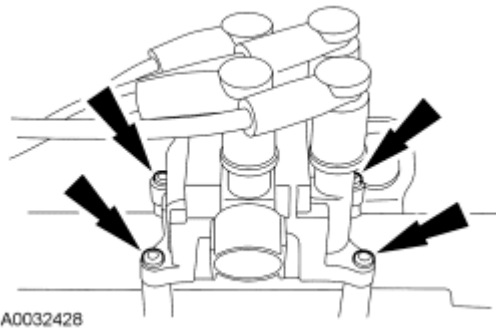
Detaching Engine Wiring Harness Anchors From Valve Cover Studs
